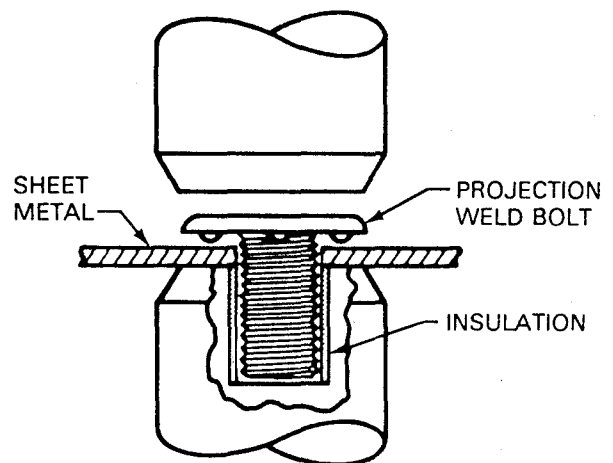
Positioning a Weld Bolt with an Insulating Sleeve
